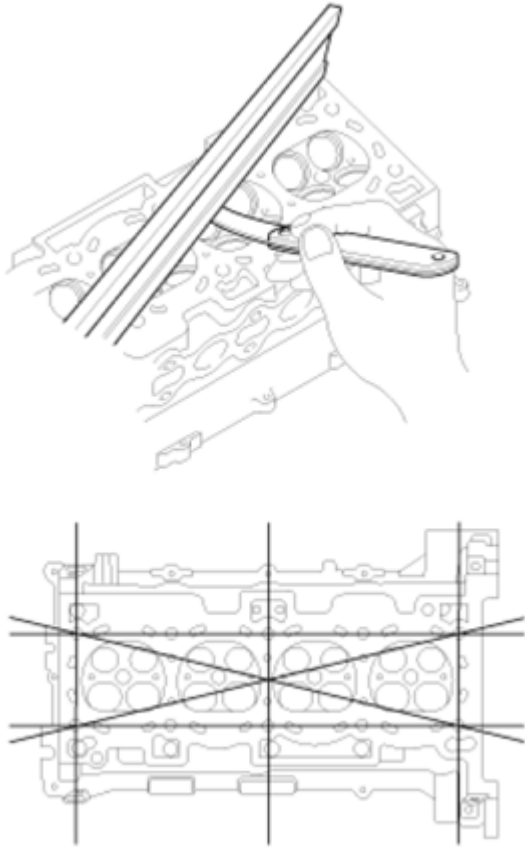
Measuring Surface Contacting Cylinder Block & Manifolds For Warpage
